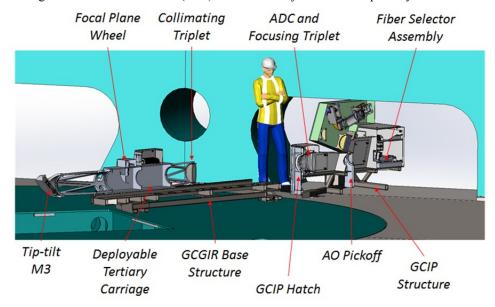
Front End Assembly Mounted to the Top of GMT's Gregorian Instrument Rotator
